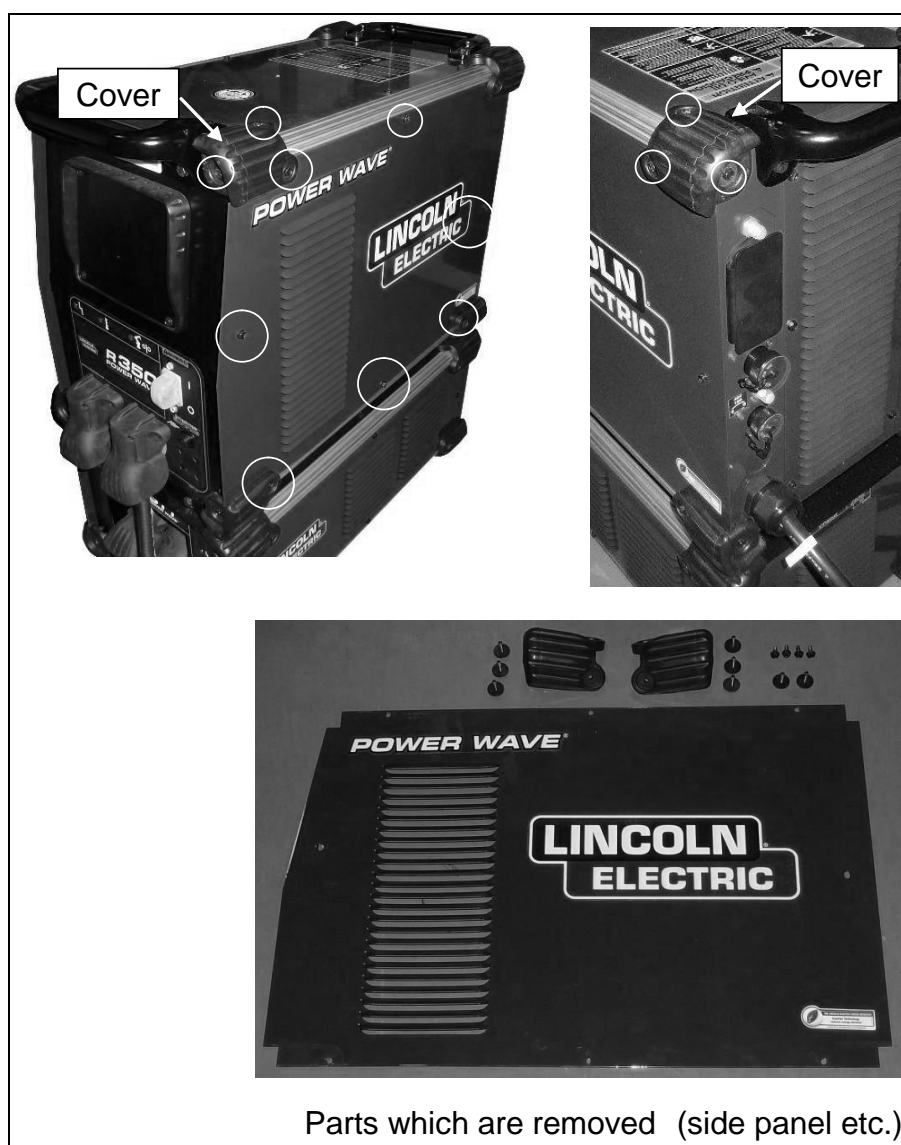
(a) Connection of welding power supply Power Wave R350, Power Wave S350
